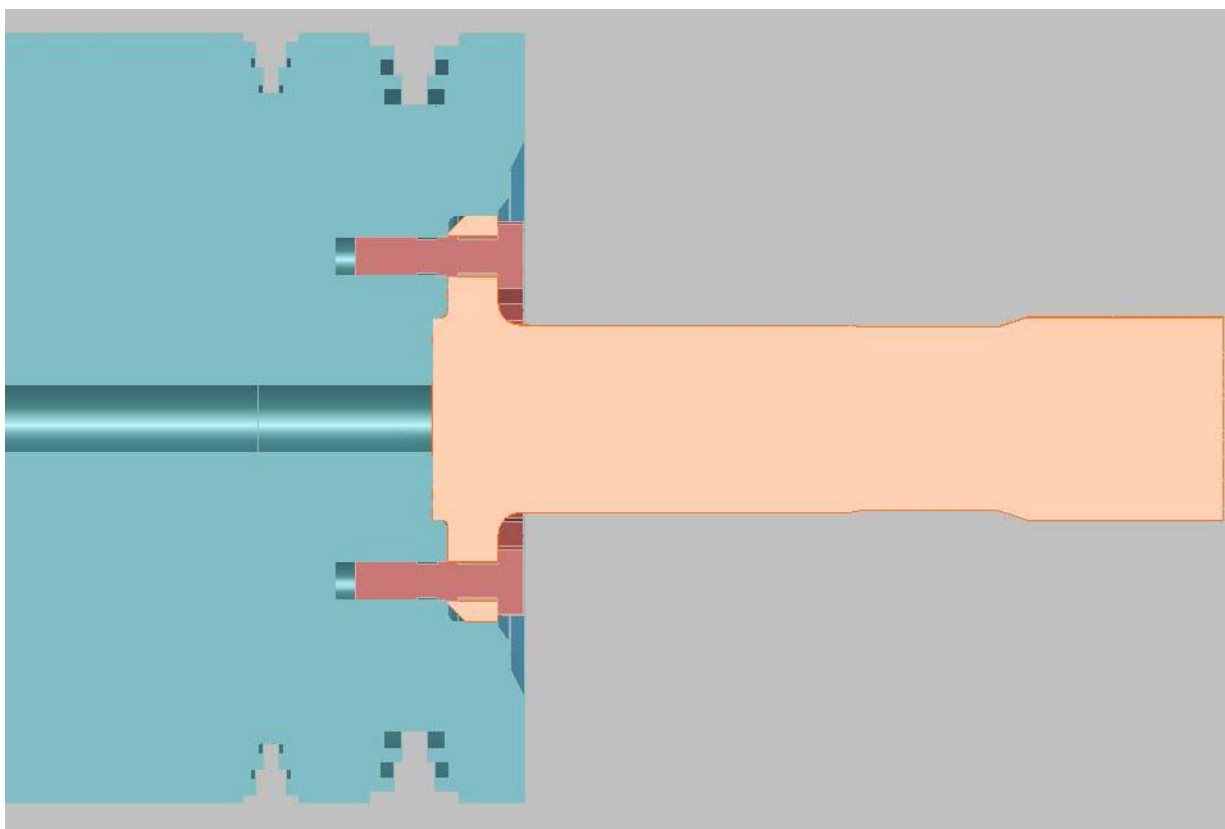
The stub shaft is assembled into LP Spindle cavity with 12 hex head bolts.
